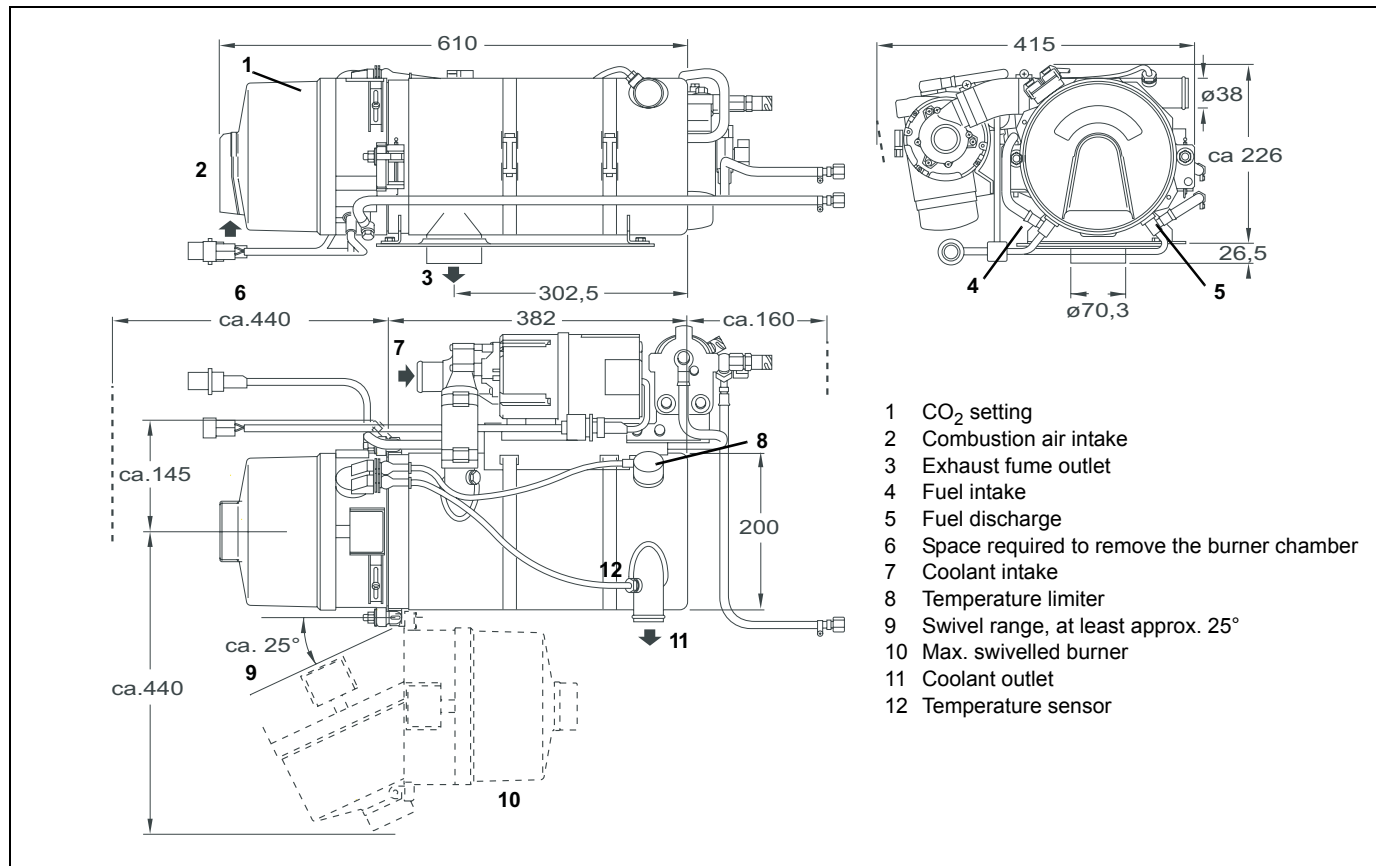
Dimensions of the Thermo 230 / 300 / 350 Rail heater
